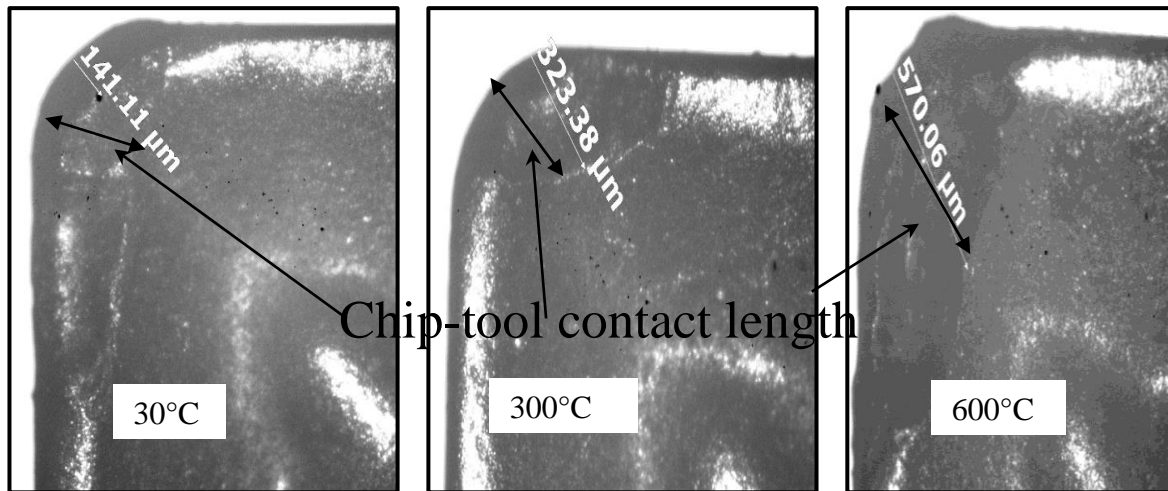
Optical microscope view of chip-tool contact length (cutting speed=100 m/min, feed=0.13 mm/rev and depth of cut=0.5 mm)
